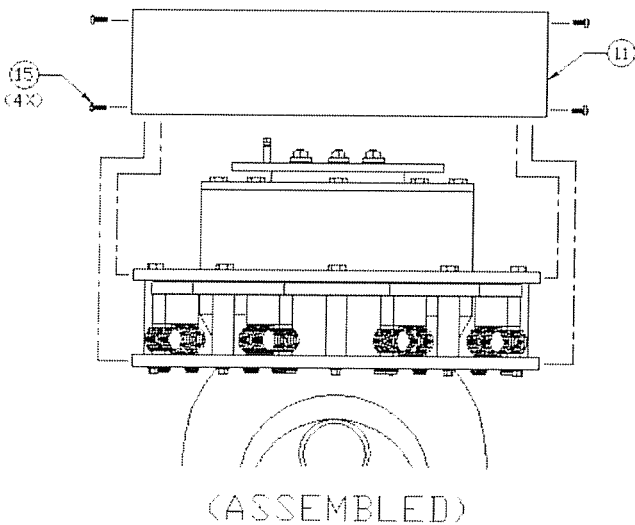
B: IR-400-2 Gimbal Adapter Assembly
